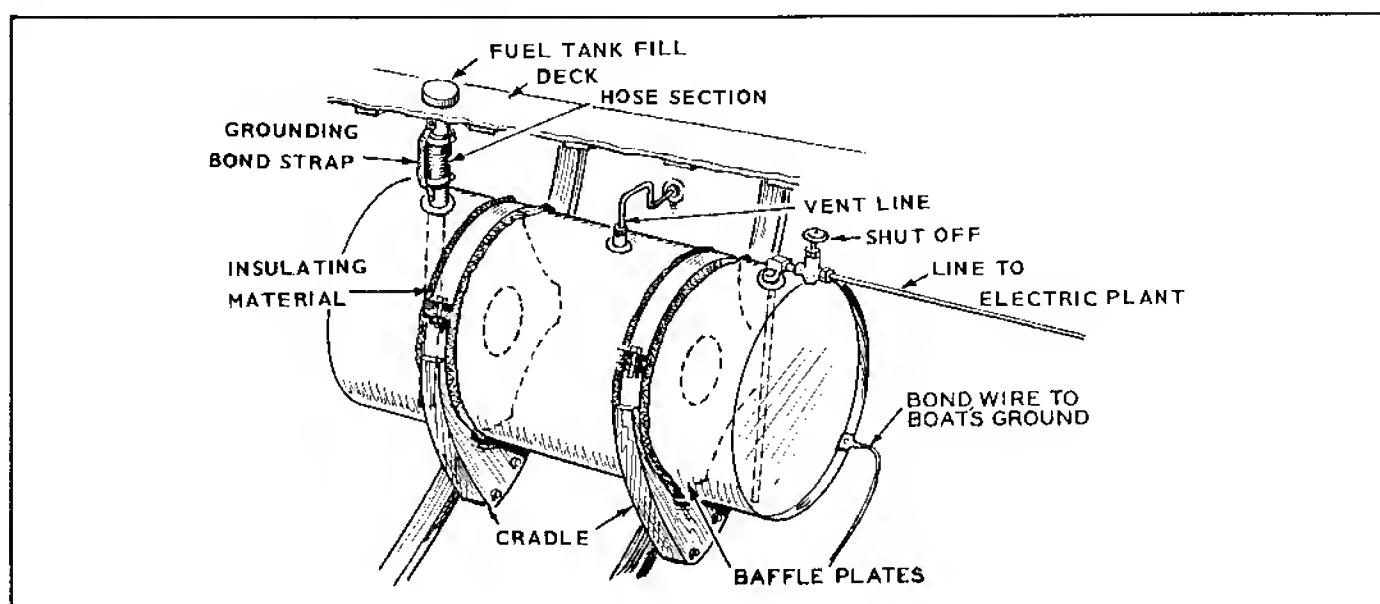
SEPARATE ELECTRIC PLANT FUEL TANK INSTALLATION
